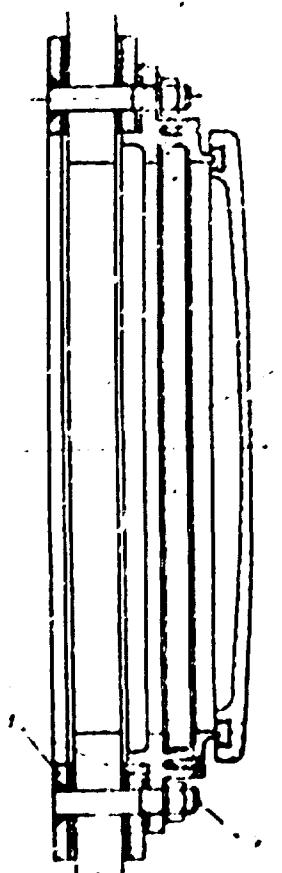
Fastening of Illuminating Device to Reinforced Concrete Hull Sheathing with Aid of Dowel Pins.
